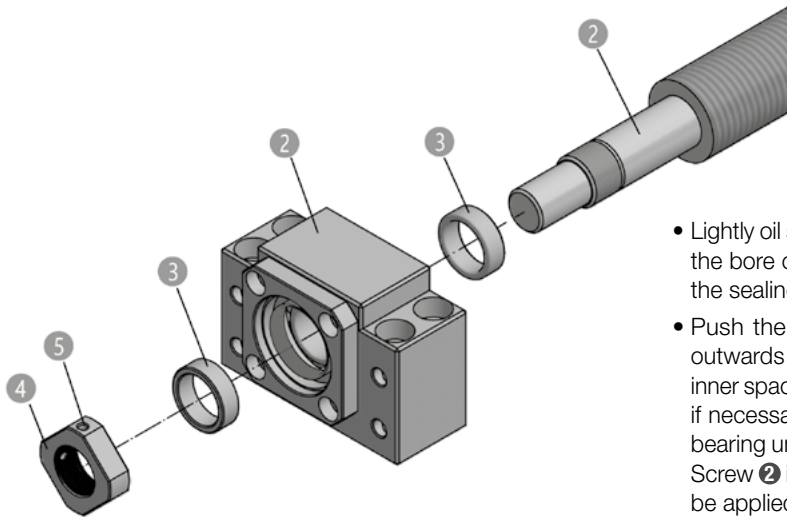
Assembly of bearing units BK, EK and FK
